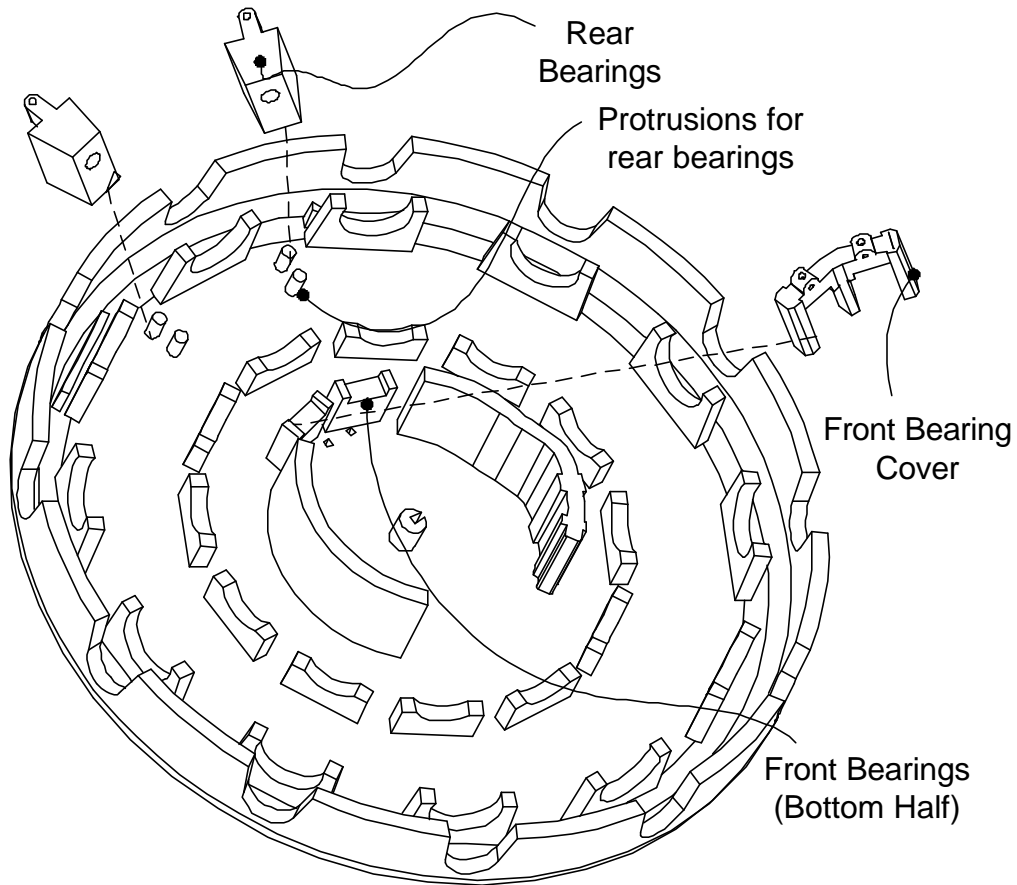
Vial Holder with Front Bearing and Rear Bearing Slots
